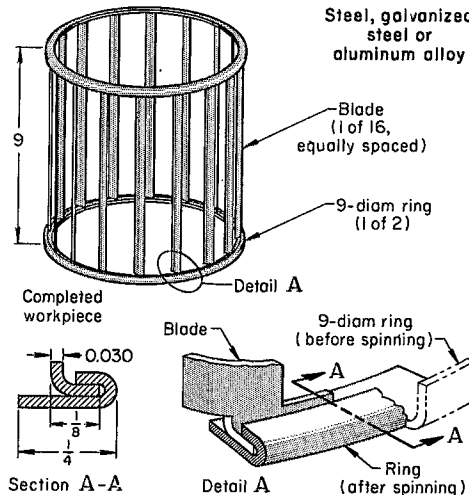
Blower wheel that was assembled by spinning (Example 276)
